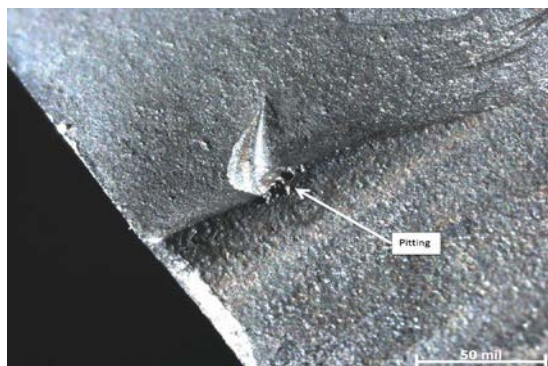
Corrosion pit at initiation of steam turbine blade fatigue failure
